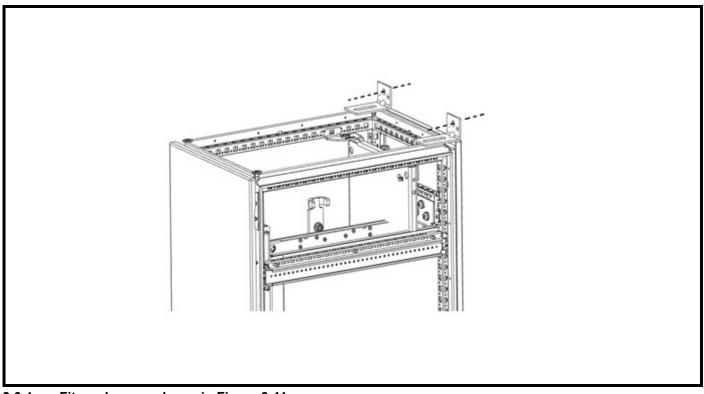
Modification details of VX25 roof plate to allow fitting of wall brackets
